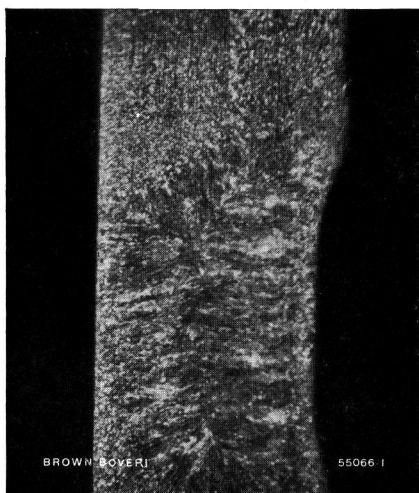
Ground section through spot weld of two 2 mm iron sheets.
